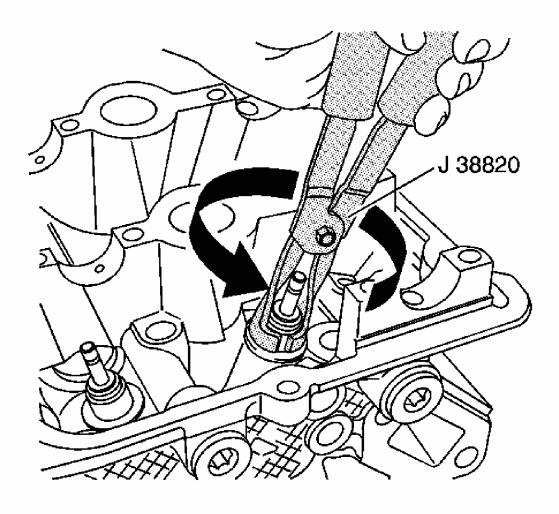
Using J 38820 To Replace Valve Seal Courtesy of GENERAL MOTORS CORP.
